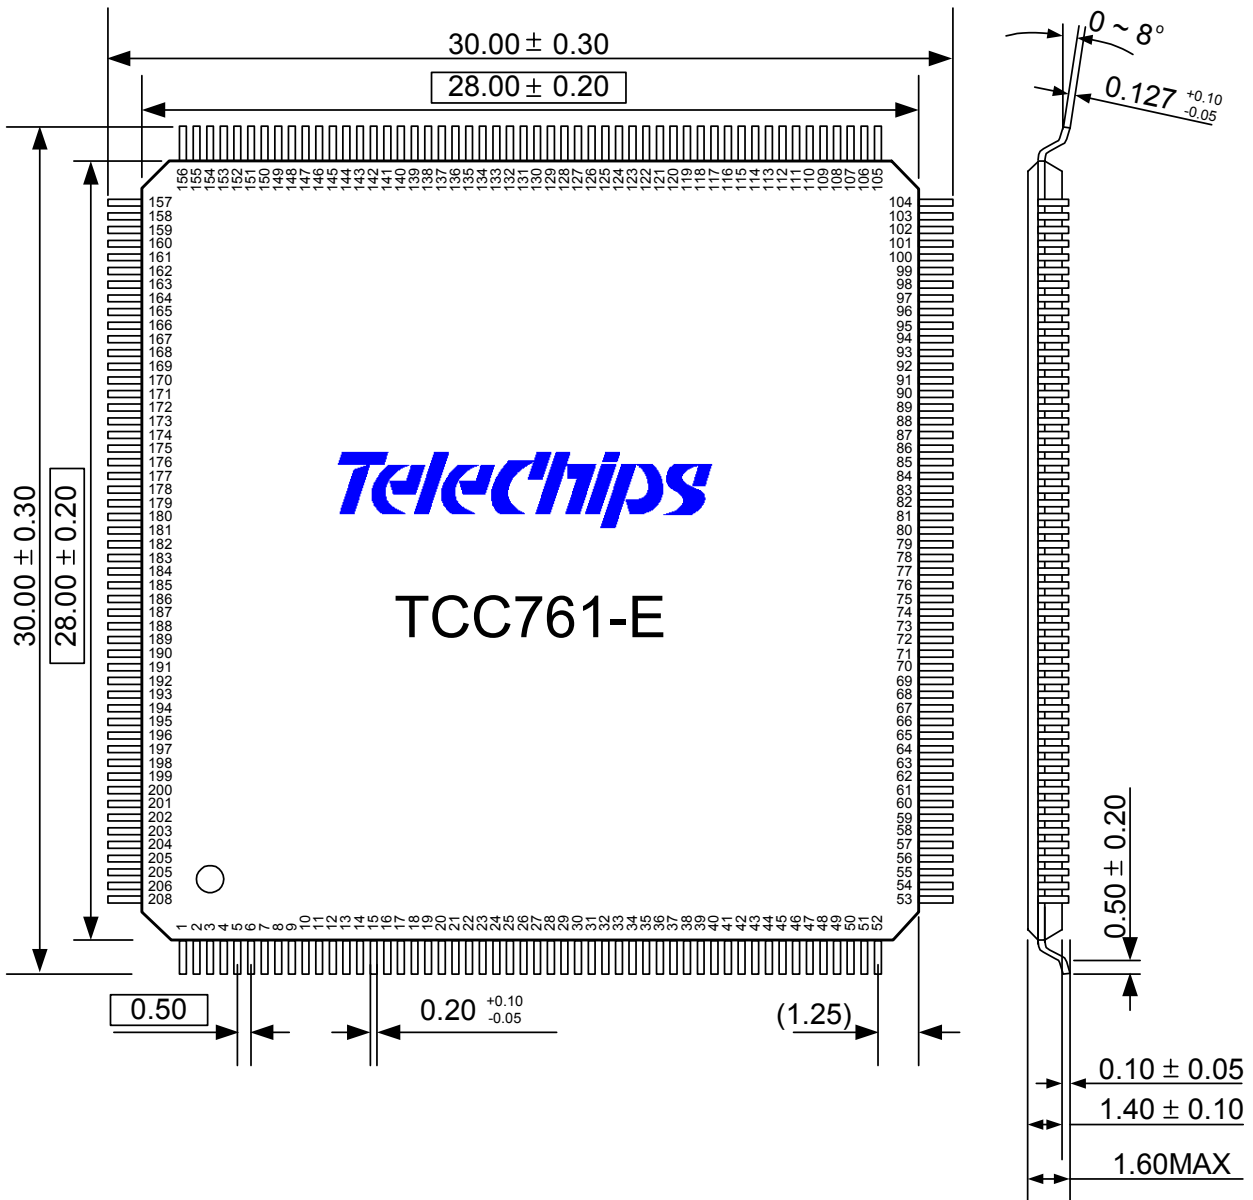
TCC761-E Package Dimension (208-LQFP-2828)
